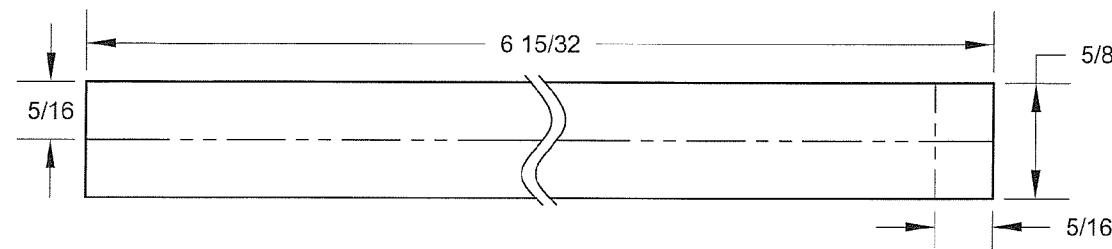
CUTTING AND MARKING THE W-1029D SPACER
